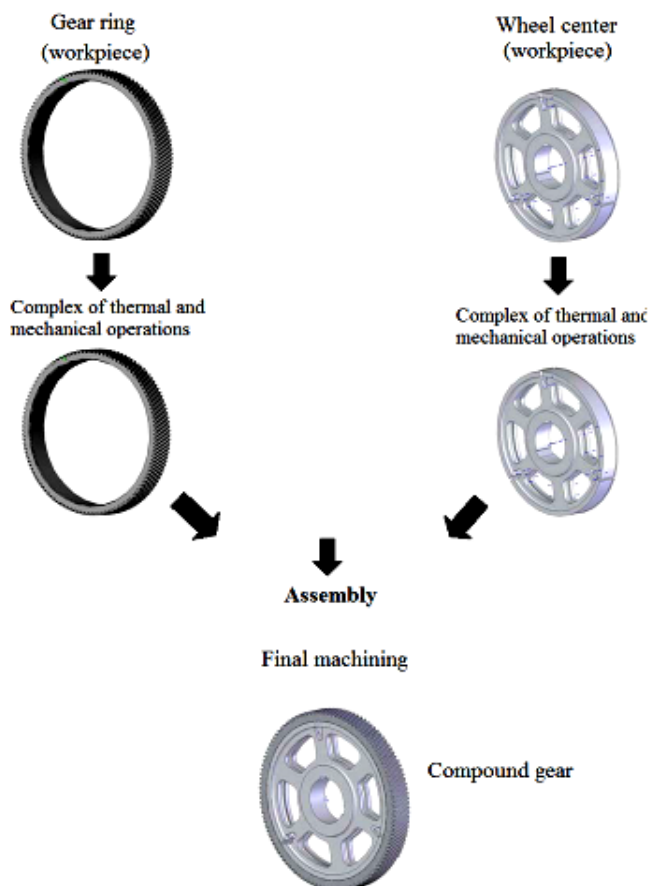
General provisions for the processing of oversized gears in a composite version during assembly by thermal action
